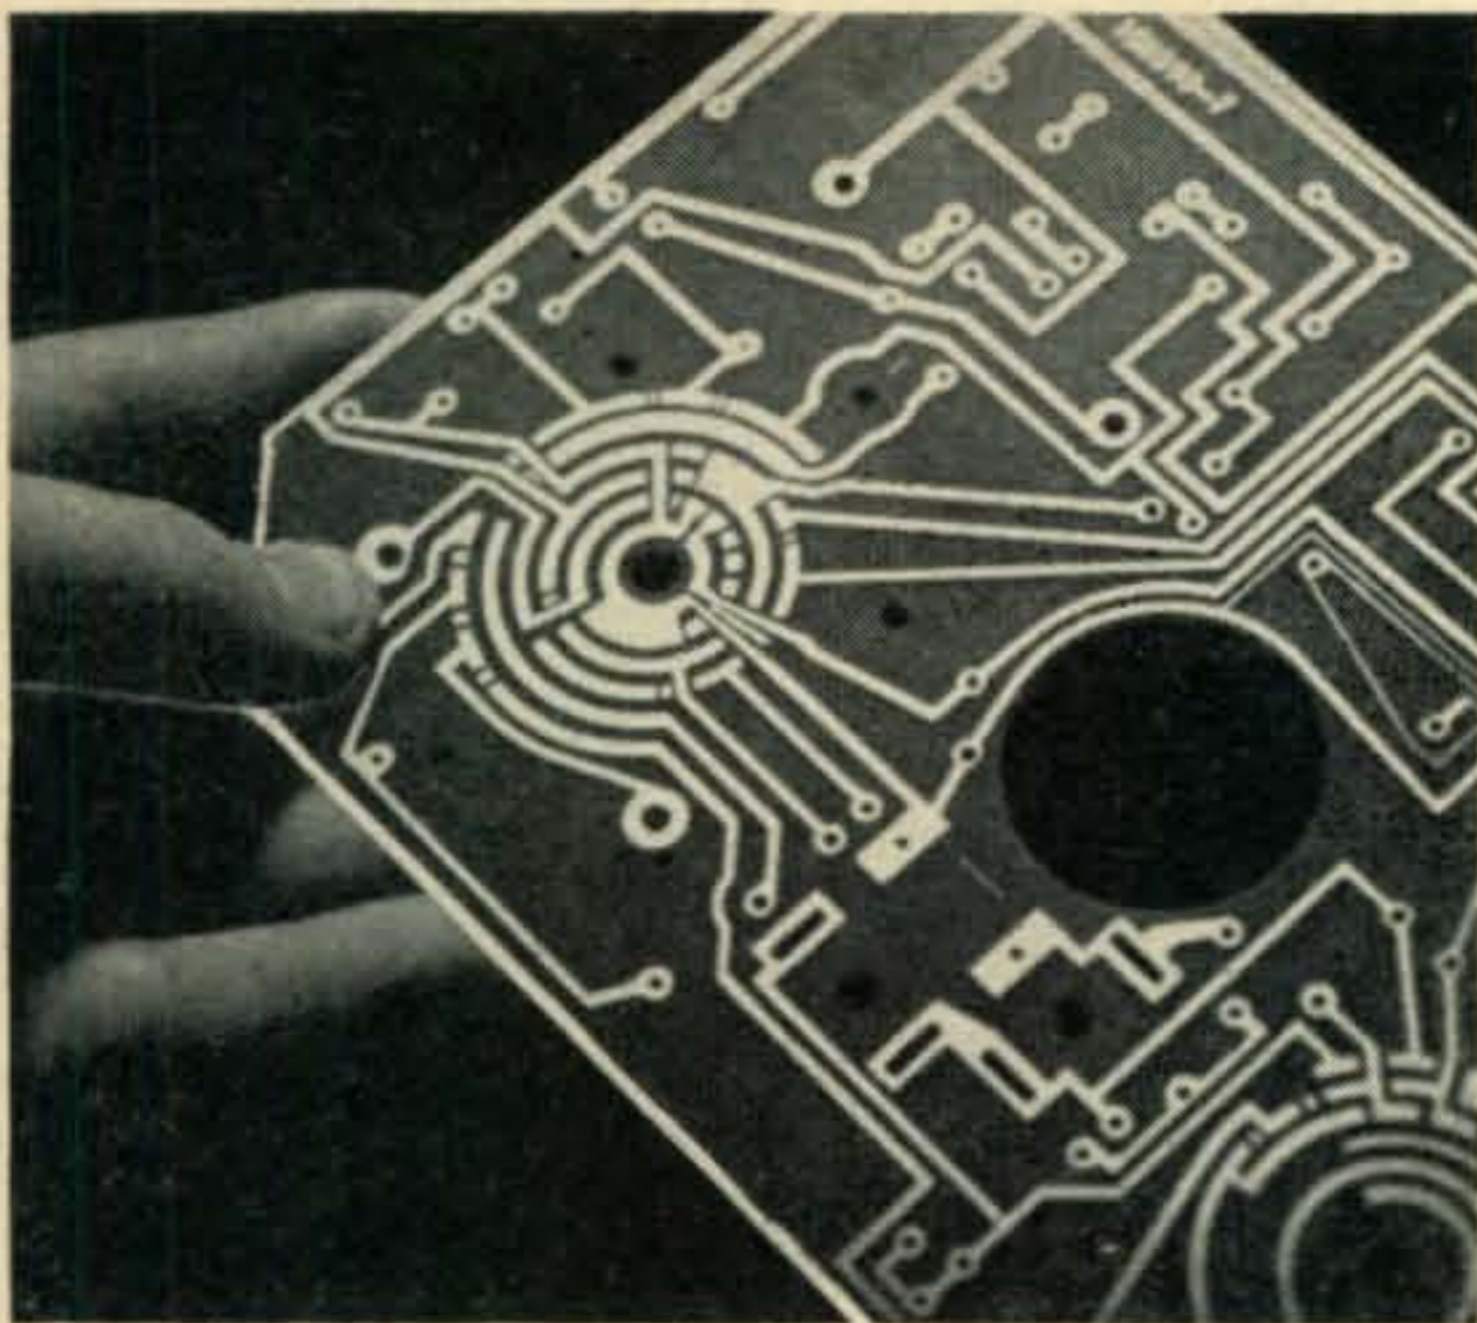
(left) Rotary switch plates are readily made as integral parts of their interconnecting circuitry. Several examples of "non-shorting" spacers between contact surfaces can be seen. This switch will be completed by addition of a shaft, bushing, contactors and a detent mechanism.
